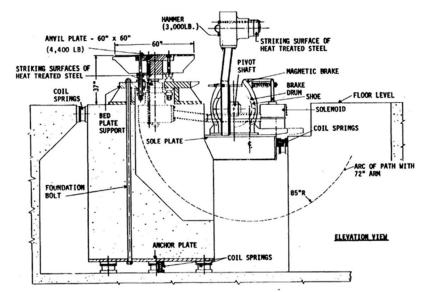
High Impact Shock Testing Machine for Medium Weight Equipment per MIL-S-901D (MWSM)
